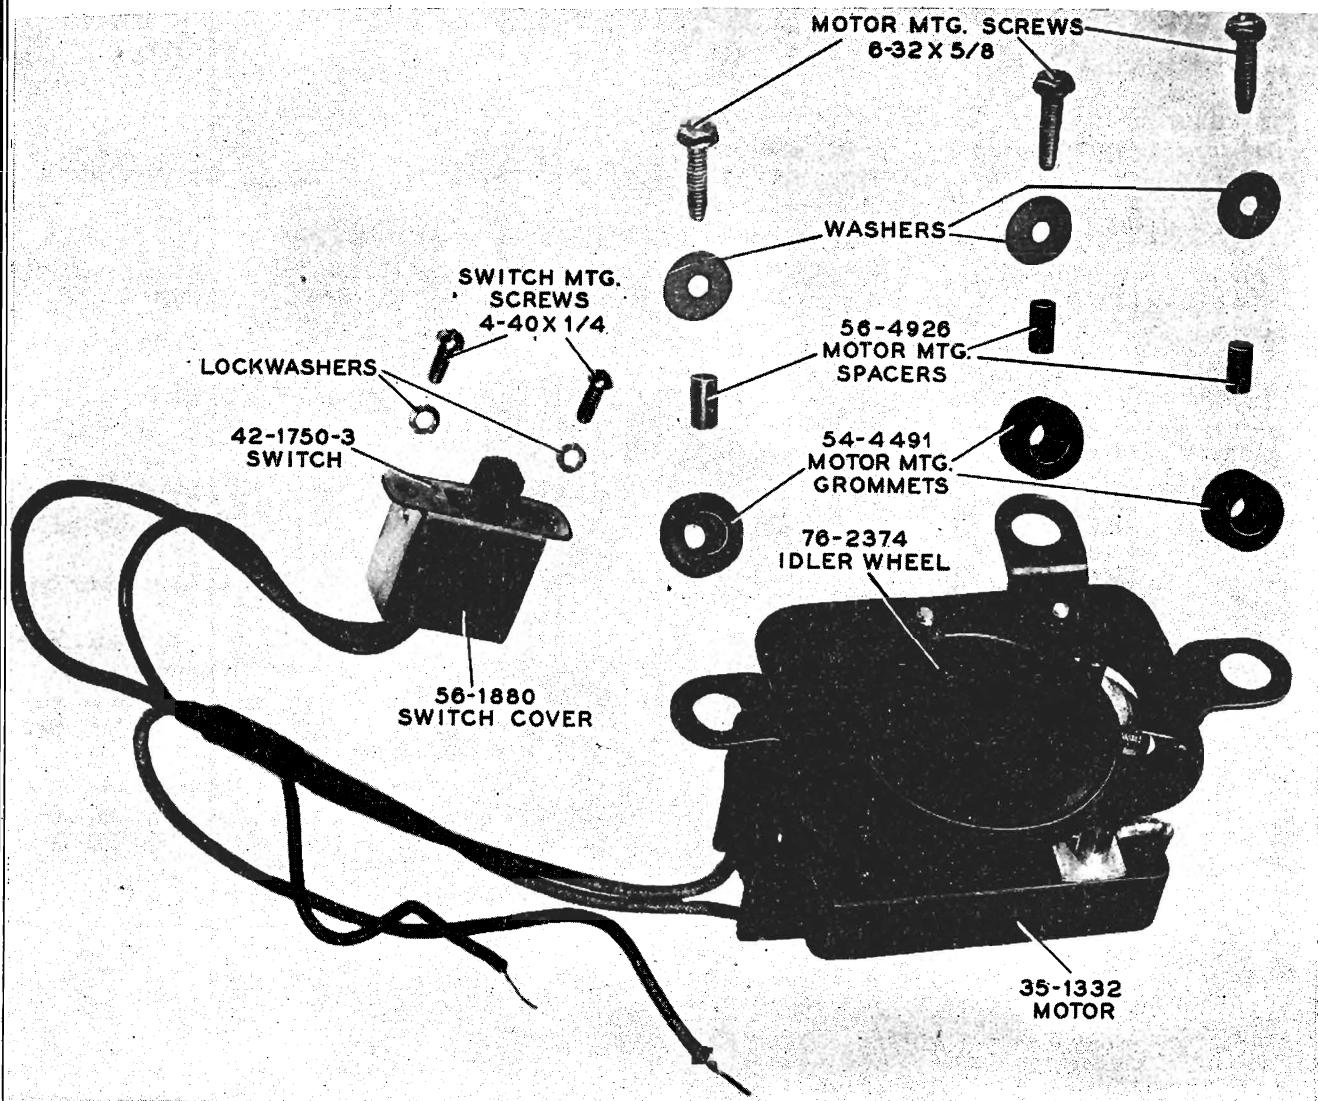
MOTOR, SWITCH, AND MOUNTING HARDWARE
